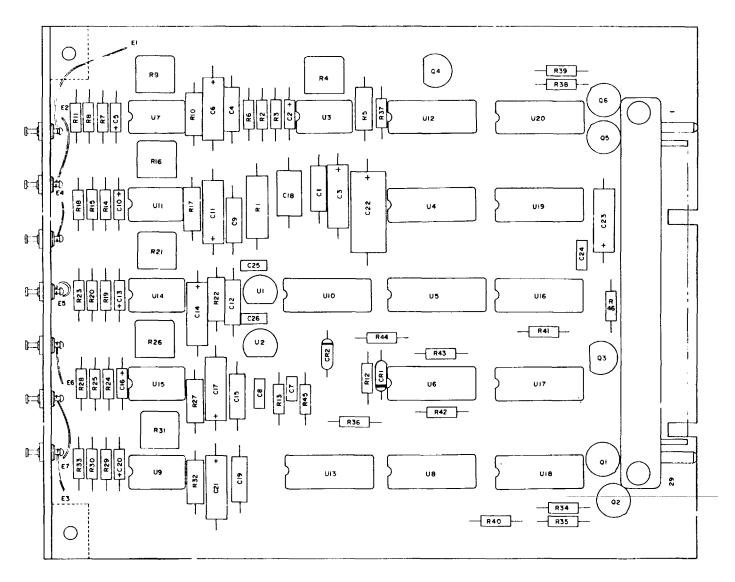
Tone Decoder Circuit Card Assembly, 1A2A1
